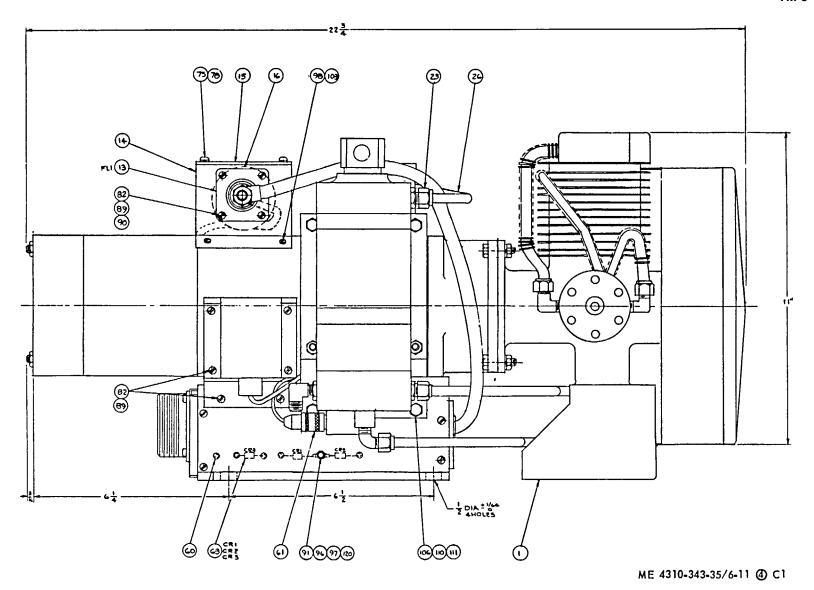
Motor-compressor assembly, Bogue Electric model 6703). (sheet 4 of 5)
